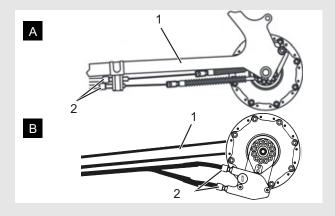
Adjusting sleeves (2) on two alternative versions (A and B) of a dual-cable, cable-operated gear shift on the chain stay (1)
